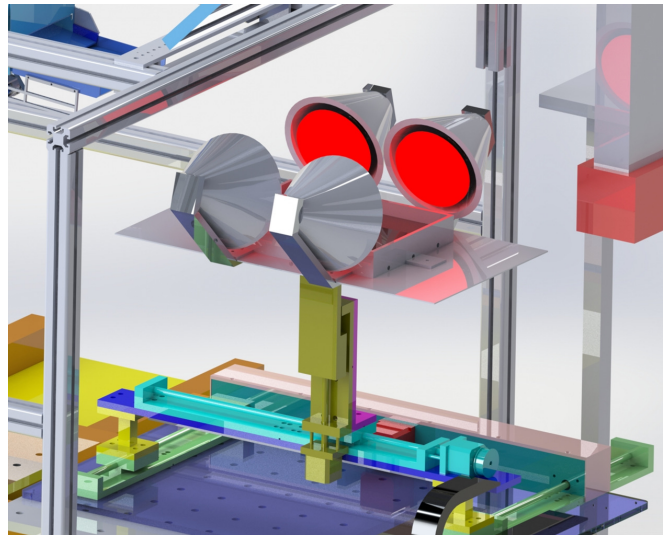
CAD drawing of the modified set-up, using infra-red lamps for keeping the sintered part at high temperature.
